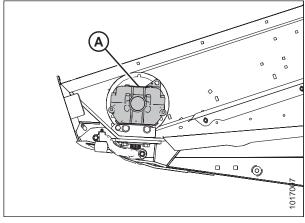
Left Side Knife Drive Box Shown -Right Side Similar
